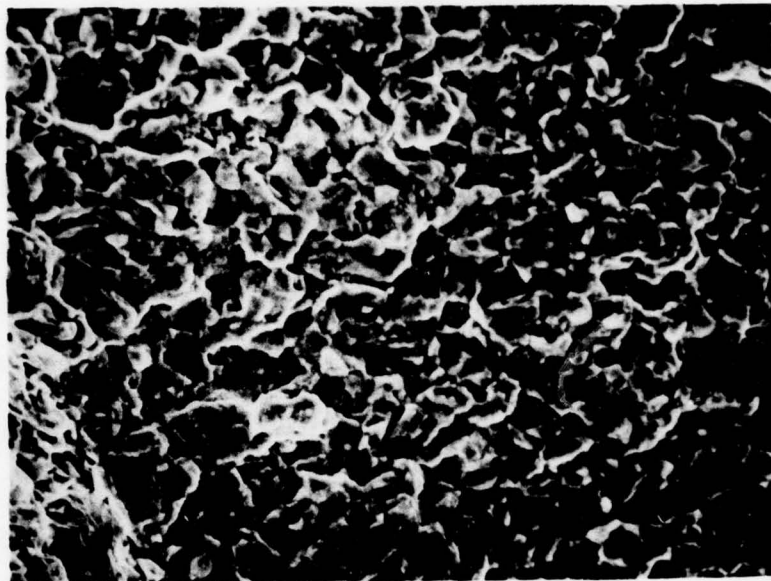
Fatigue Surface, 650°C Dwell Specimen.
